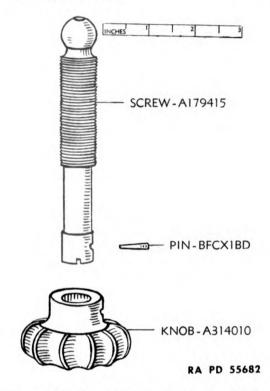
Elevating Knob and Elevation Screw—Exploded View
